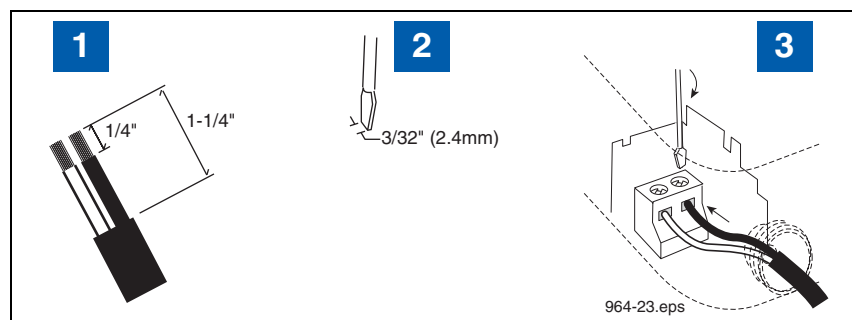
Connecting Input Wiring To Transmitter Terminal Blocks
